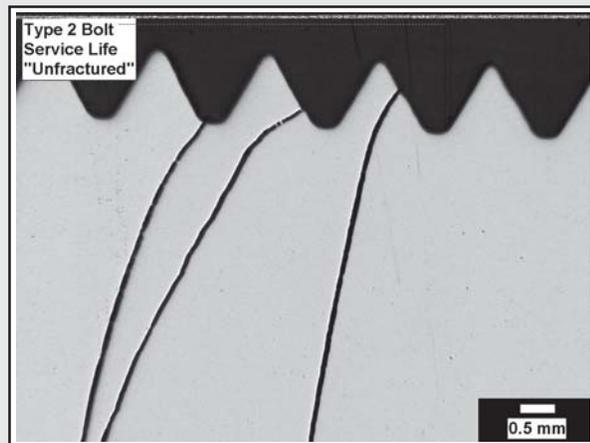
Thread form profile in type 2 bolt. The three cracks seen here were the only ones in the bolt and extend almost across the entire diameter.
